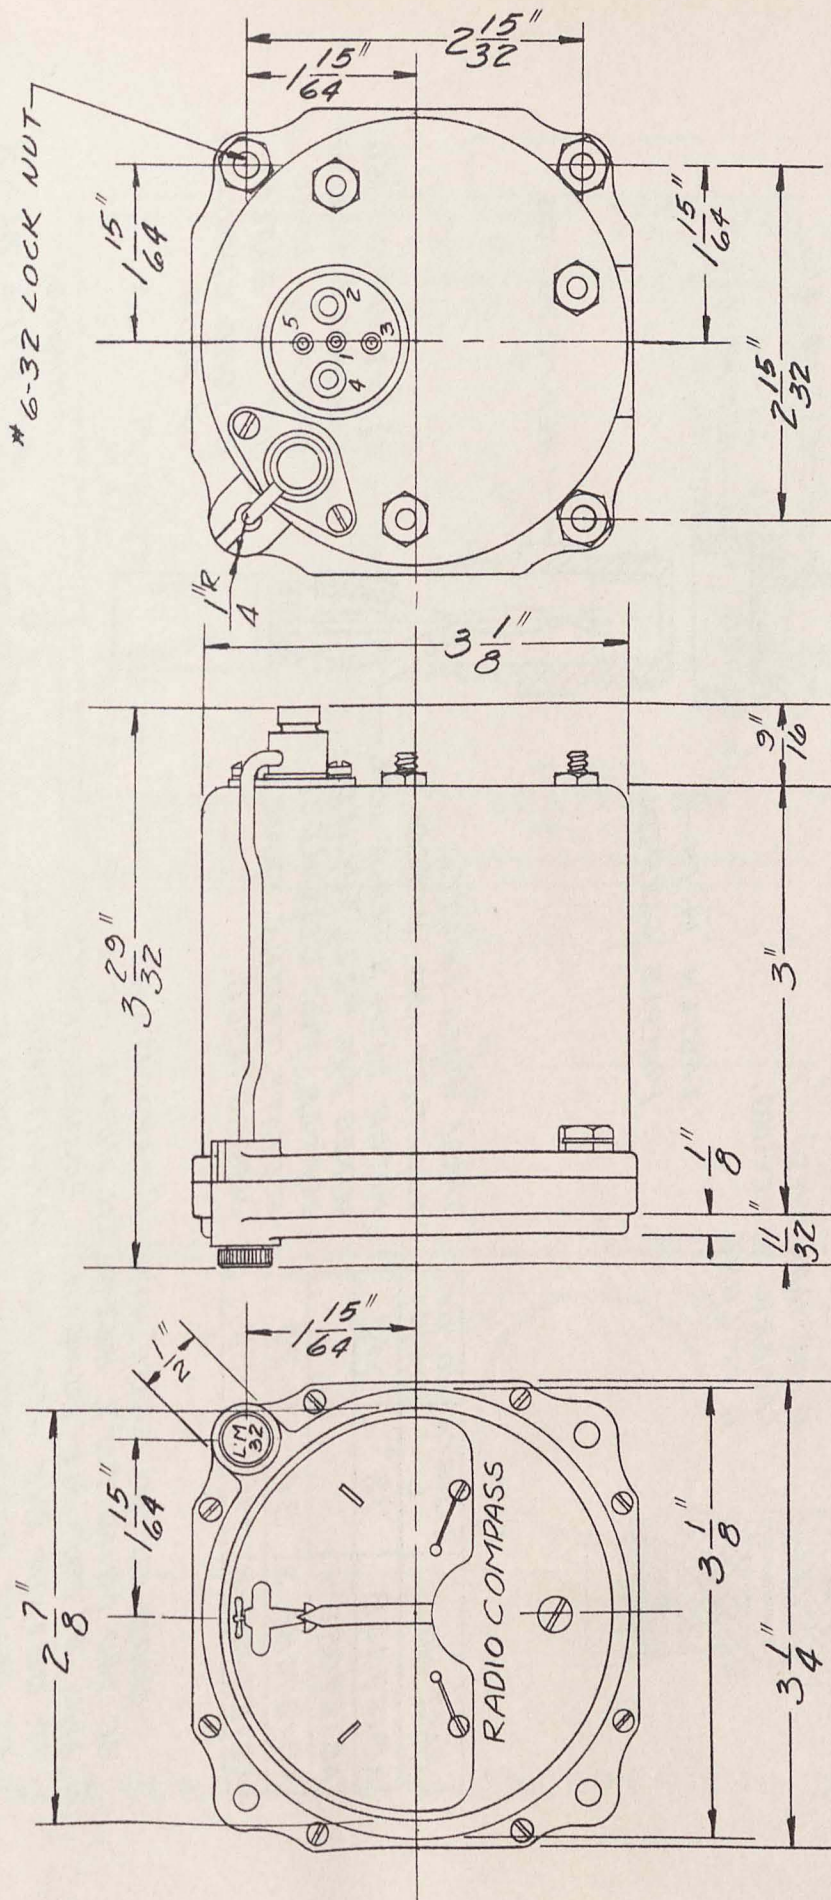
OUTLINE DRAWING—COMPASS INDICATOR I-65-B
